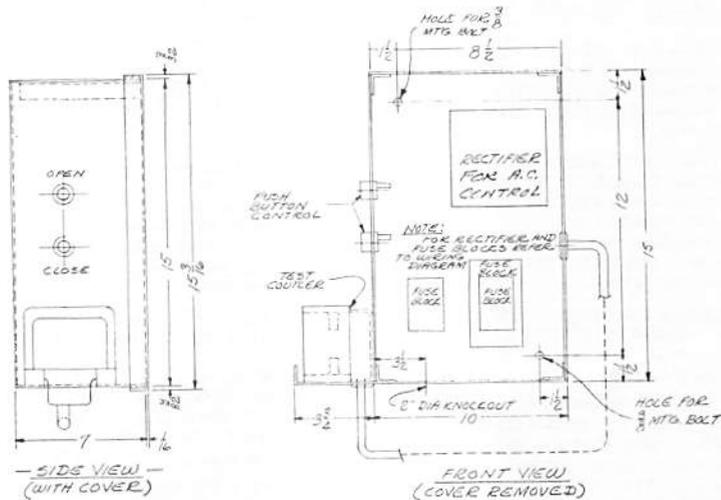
Inspection Box for 13.8 KV Metal-clad Switchgear
